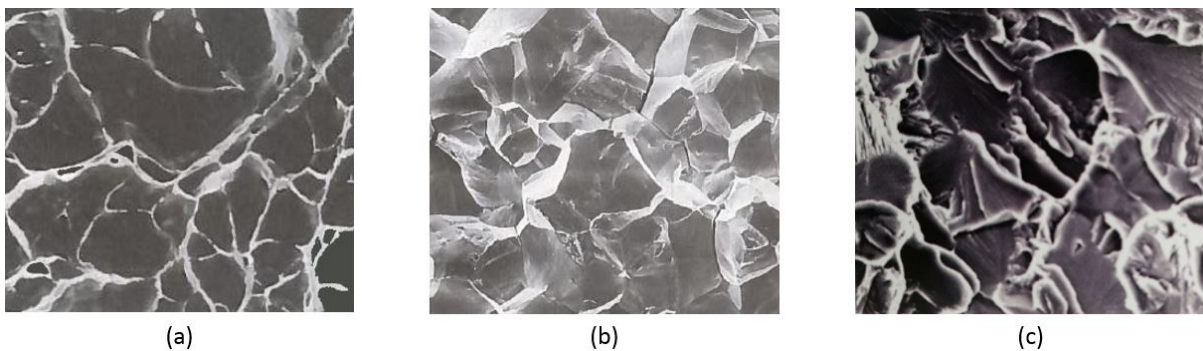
Scanning electron microscope images showing dimples characteristic of ductile fracture (a) [7, p. 238], intercrystalline fracture surface (b) [7, p. 241] and cleavage fracture (c) [2, p. 83].
